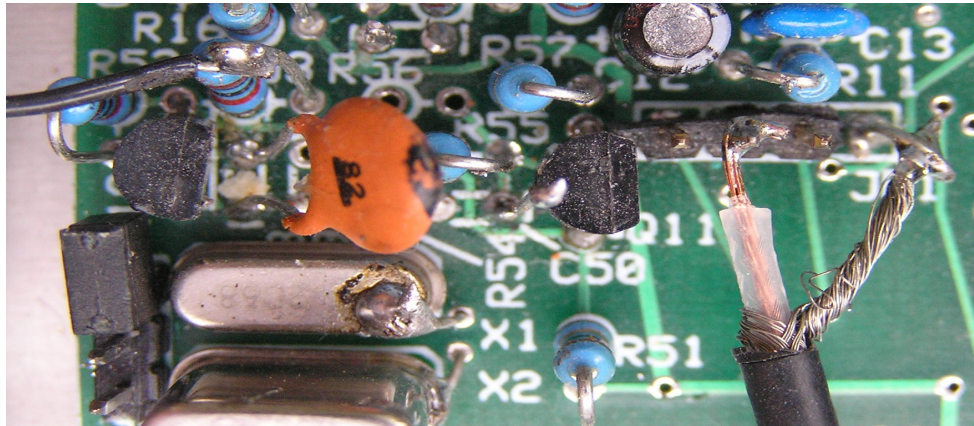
Connection of Coaxial Cable to RXTX PCB JP1
